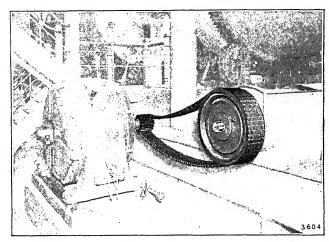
SILENT CHAIN DRIVE FROM ELECTRIC MOTOR.
